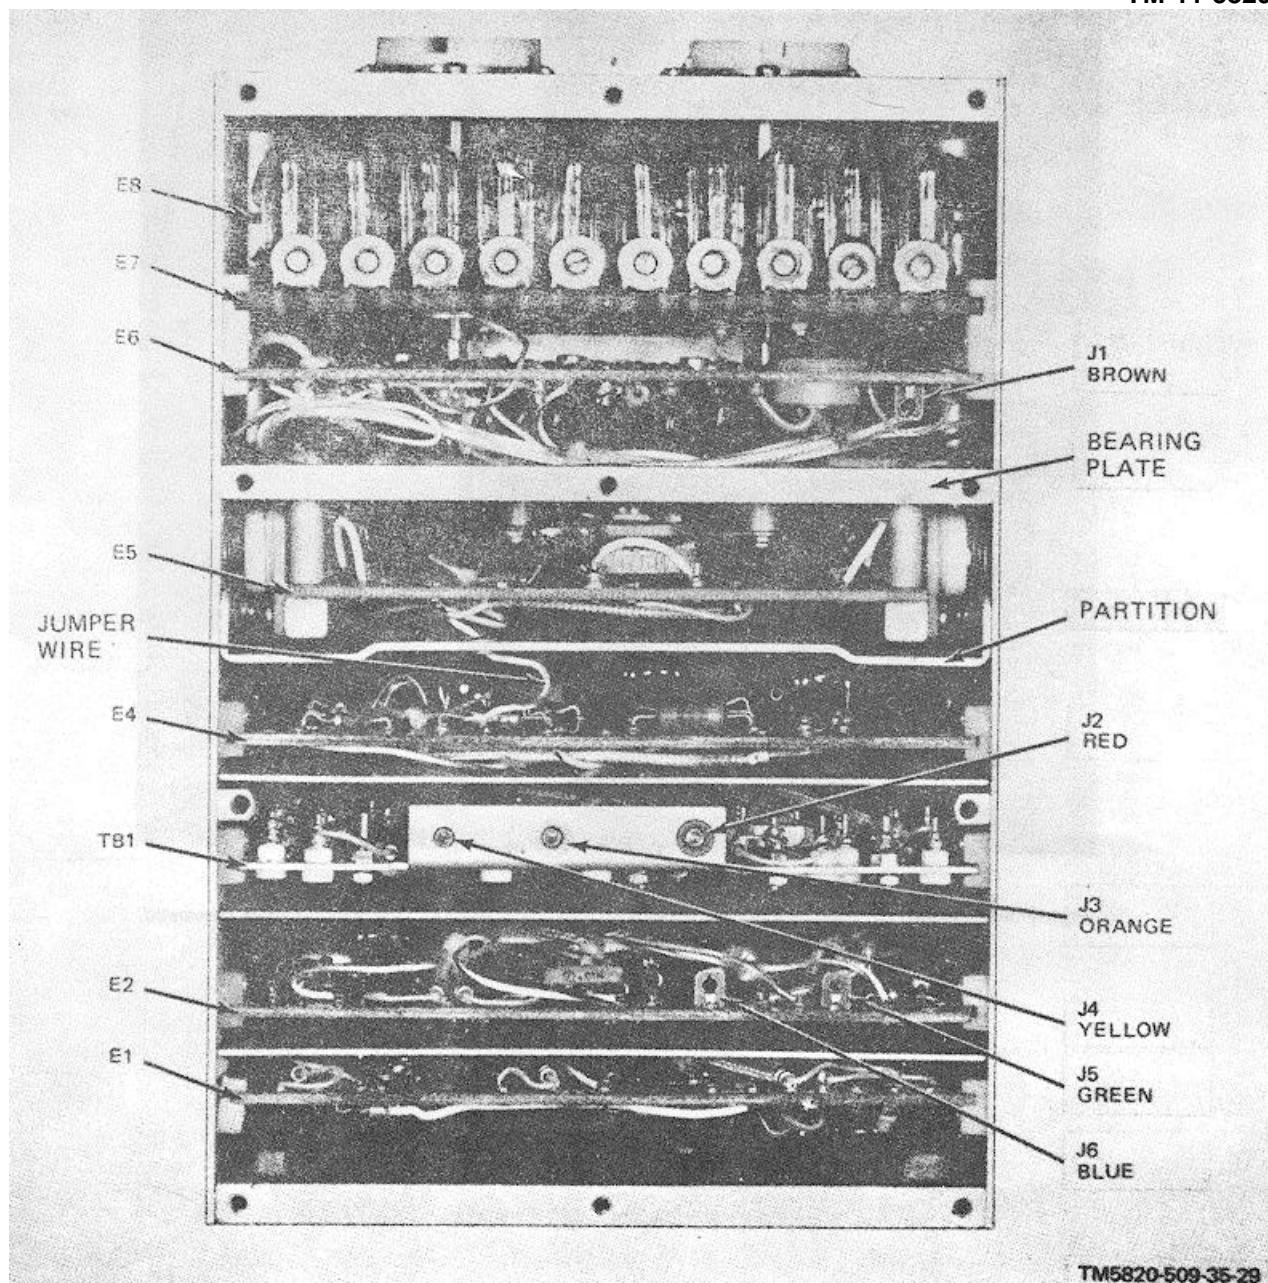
Oscillator Control C-4311/PRC-47 (A8A7), Top View, Cover Removed, Location of Subassemblies and Test Points.
